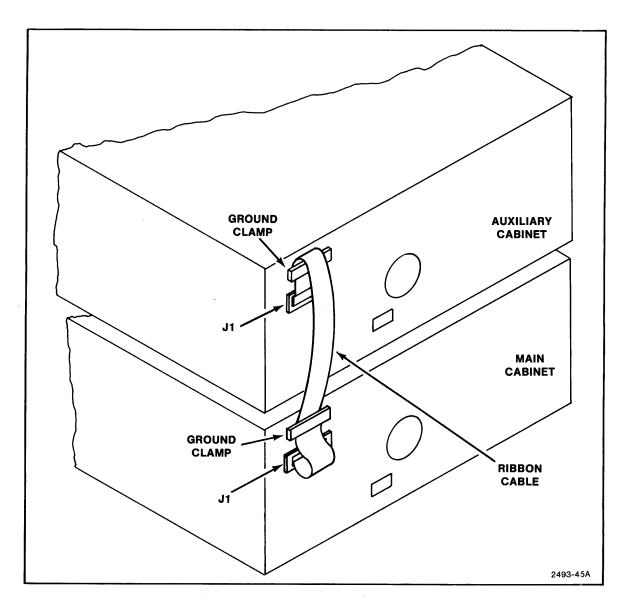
Securing ribbon cable to rear of main and auxiliary cabinets.
